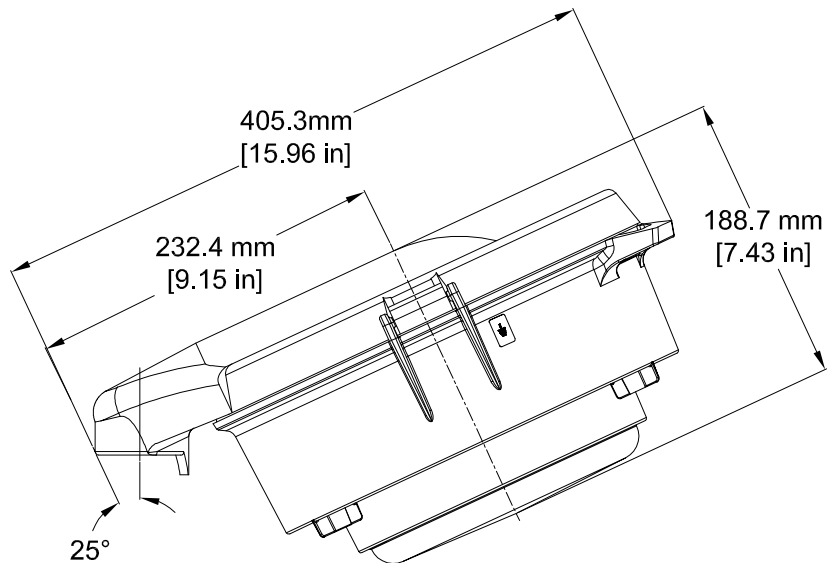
LUMINAIRE WITH 25° STANCHION HOOD
